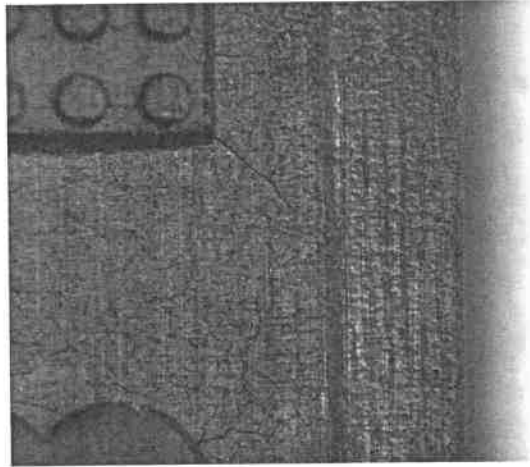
Insert surface after 2658 shots showing crack origin at edges as well as parts of the protected surface without cracks.
